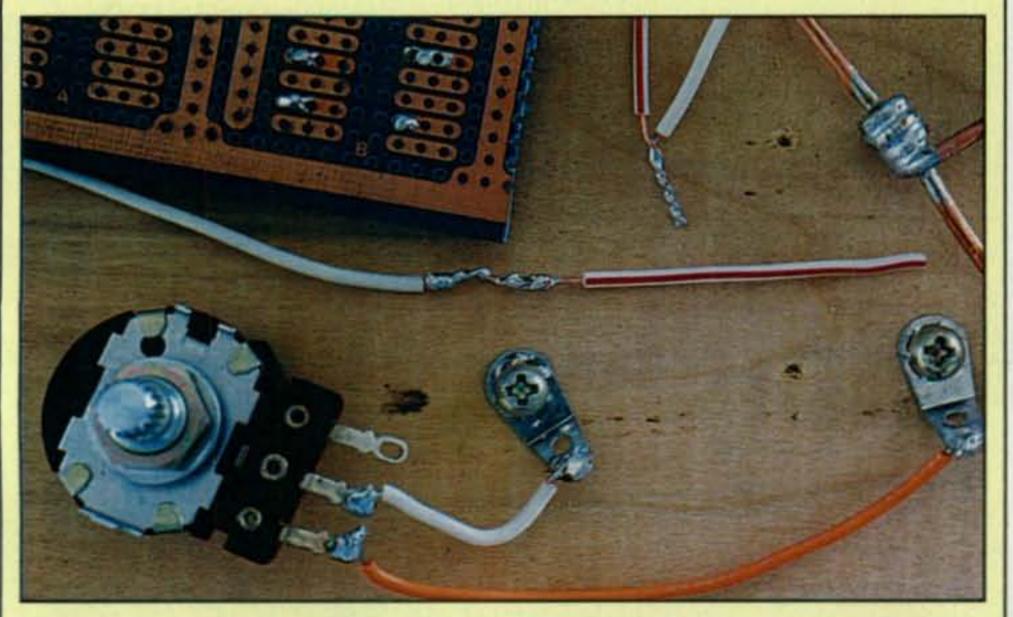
Photo A- The soldering practice board. Practice making wire splices with both stranded and solid copper wire. These connections are especially useful for wire antennas, including the trusty dipole.
